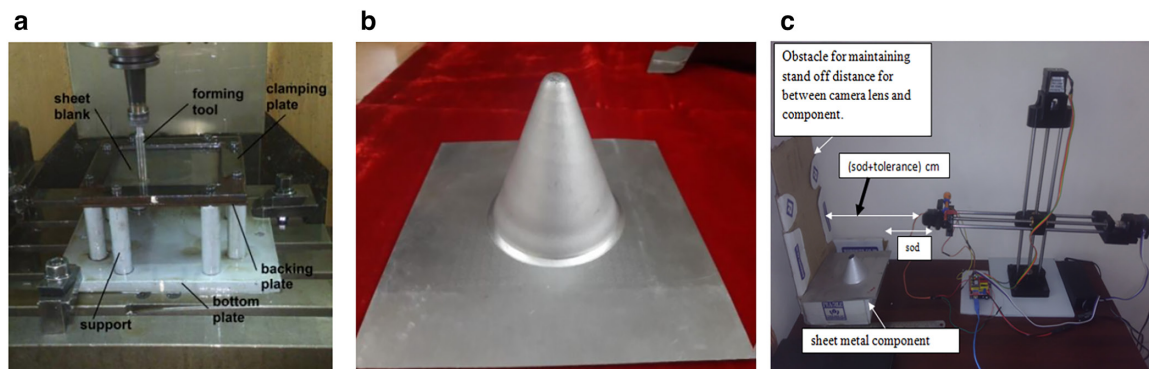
(a) & (b) Fixture along with sheet metal and formed component. (c) Setup to measure the strain on the surface of the formed component.
